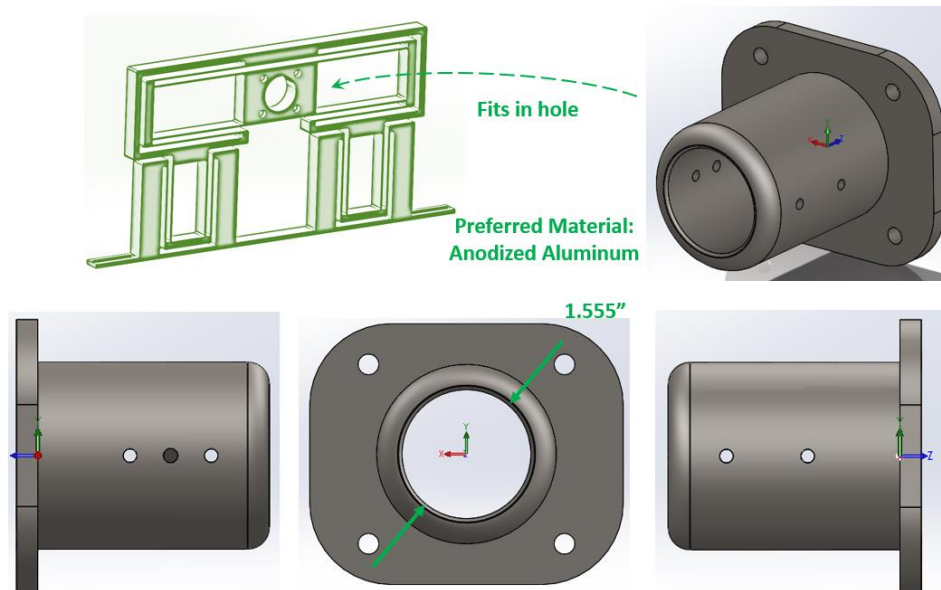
CAD drawing of custom mount designed to house the air bushing for the print roller.
